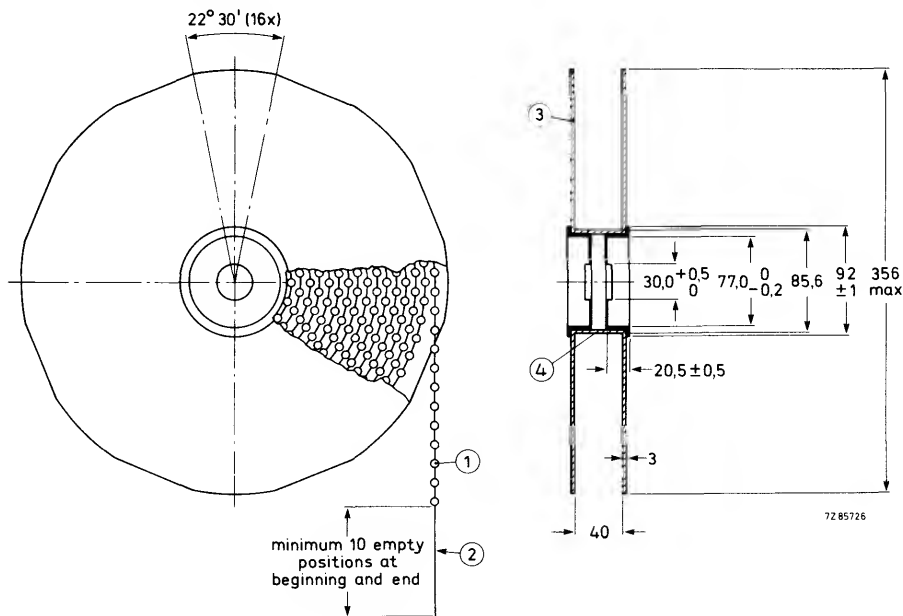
Reel dimensions (mm) for radial-taped diodes.
